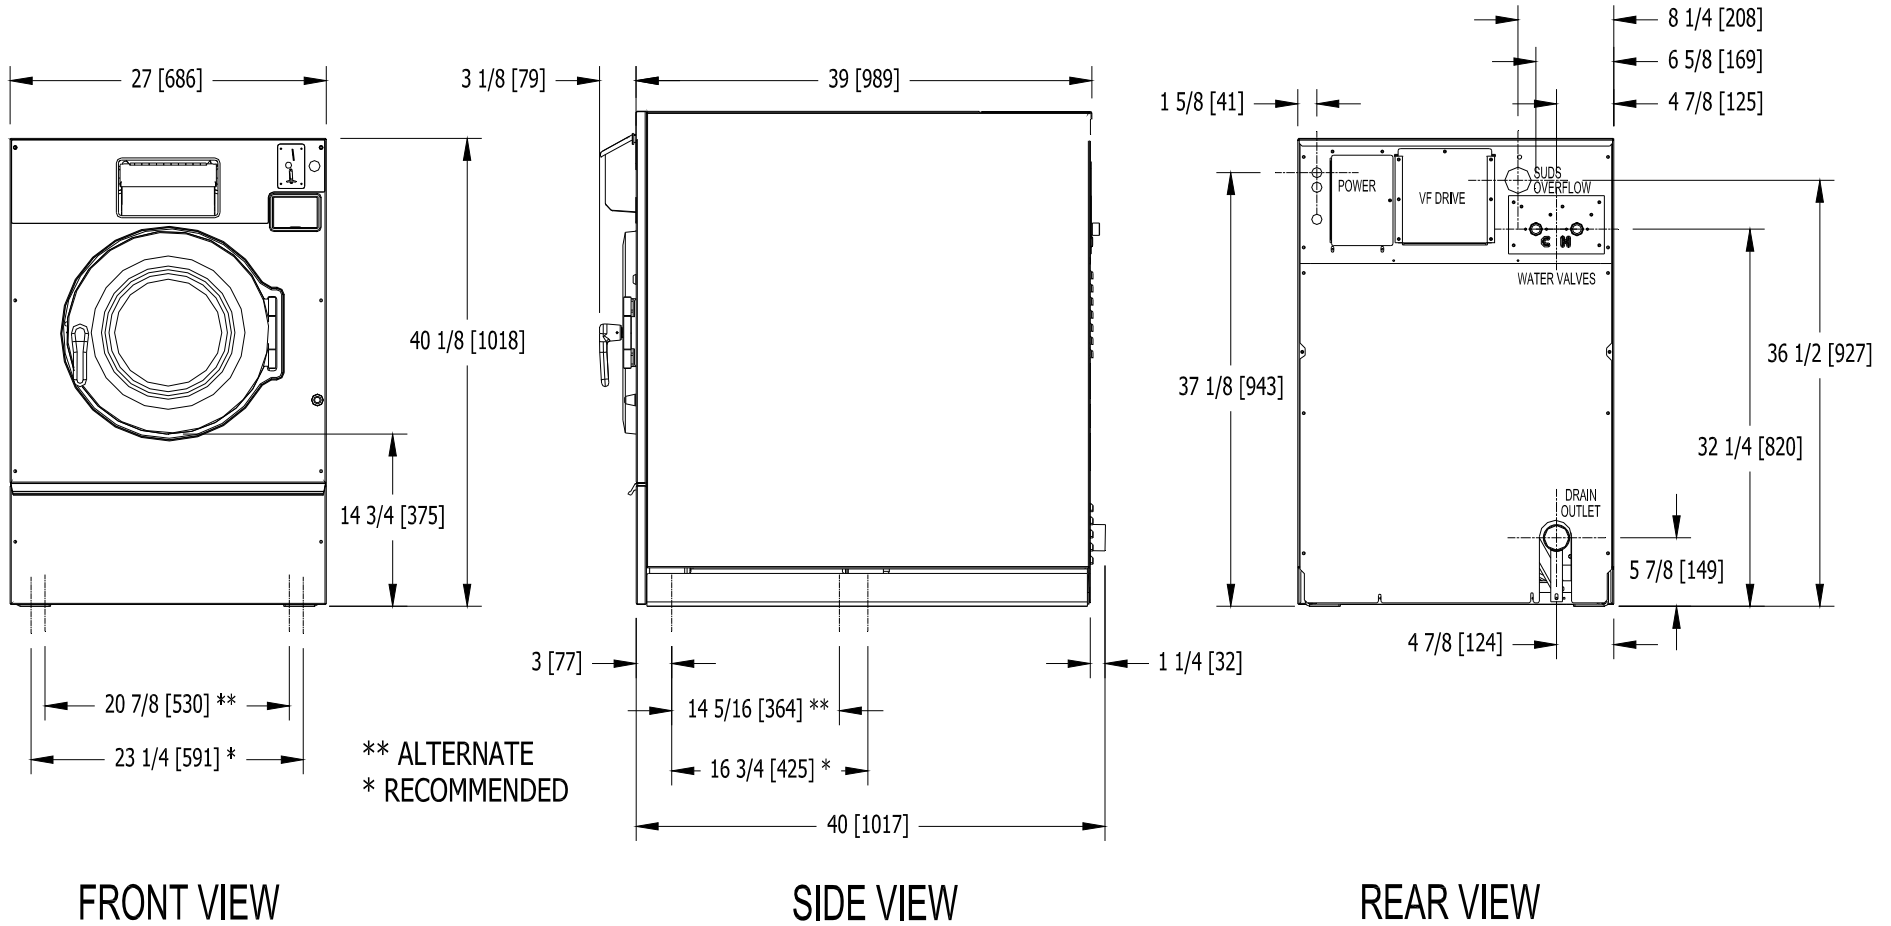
T-350 SWD Commercial Washer Dimensions
